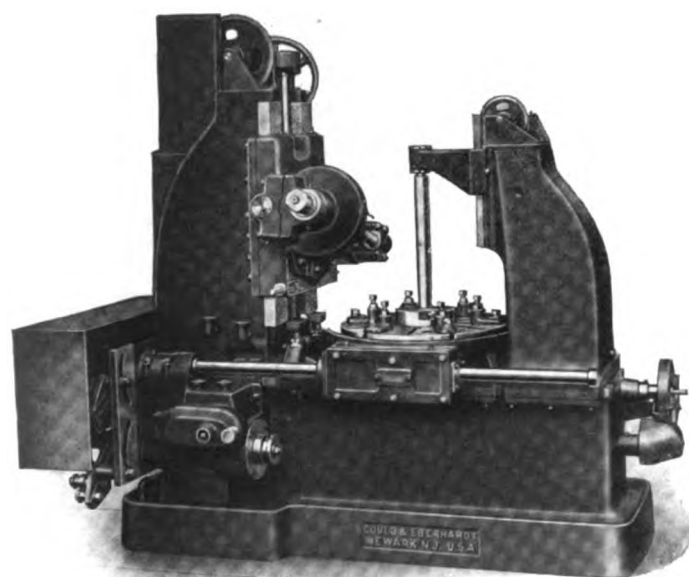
No. 36 H—Automatic Gear Hobbing Machine.
